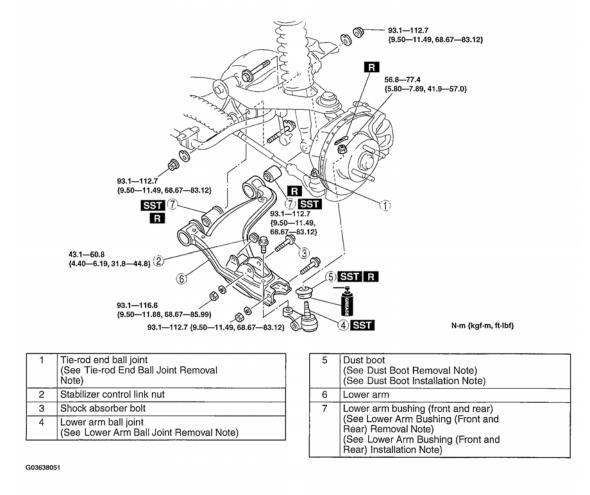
View Of Front Lower Arm & Torque Specifications Courtesy of MAZDA MOTORS CORP.
